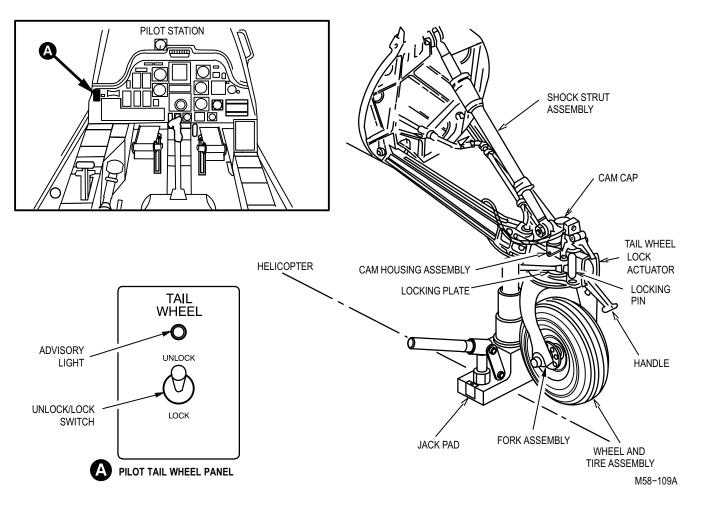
Pilot TAIL WHEEL Panel and Tail Wheel Assembly
